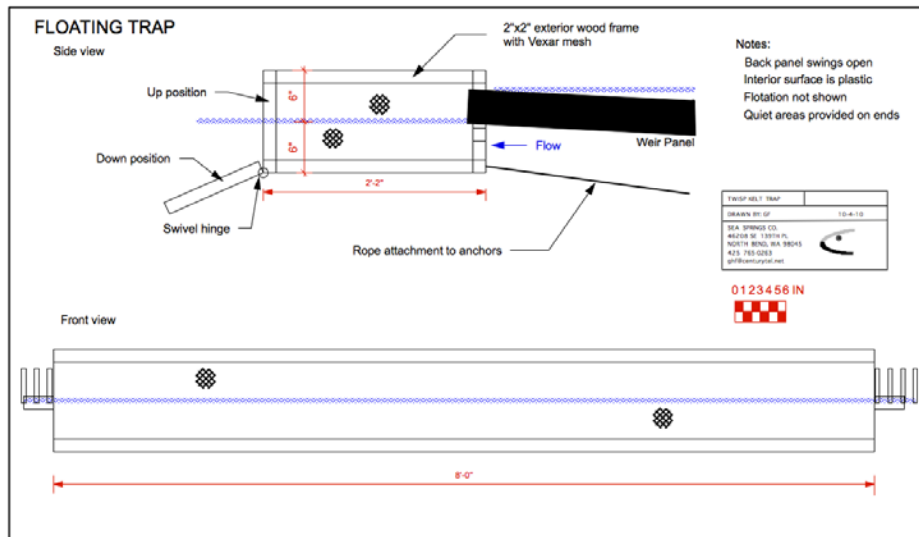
Plan view of proposed temporary trap for capture downstream migrating kelts at the Twisp weir.
